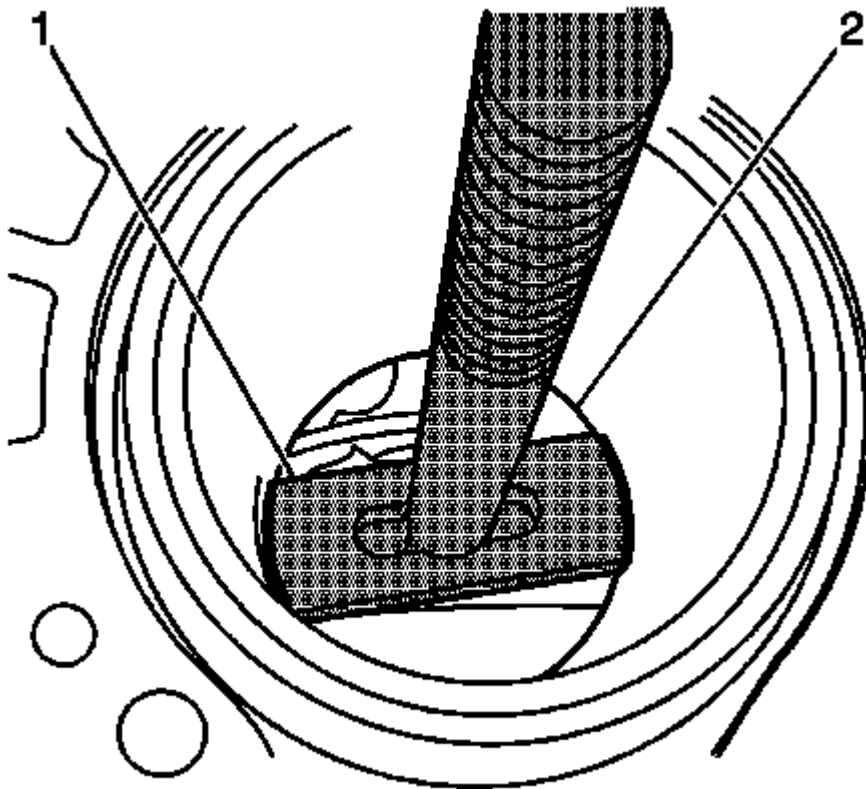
Identifying Cylinder Bore Sleeve Puller EN 45680-852 Shoe & Sleeve
